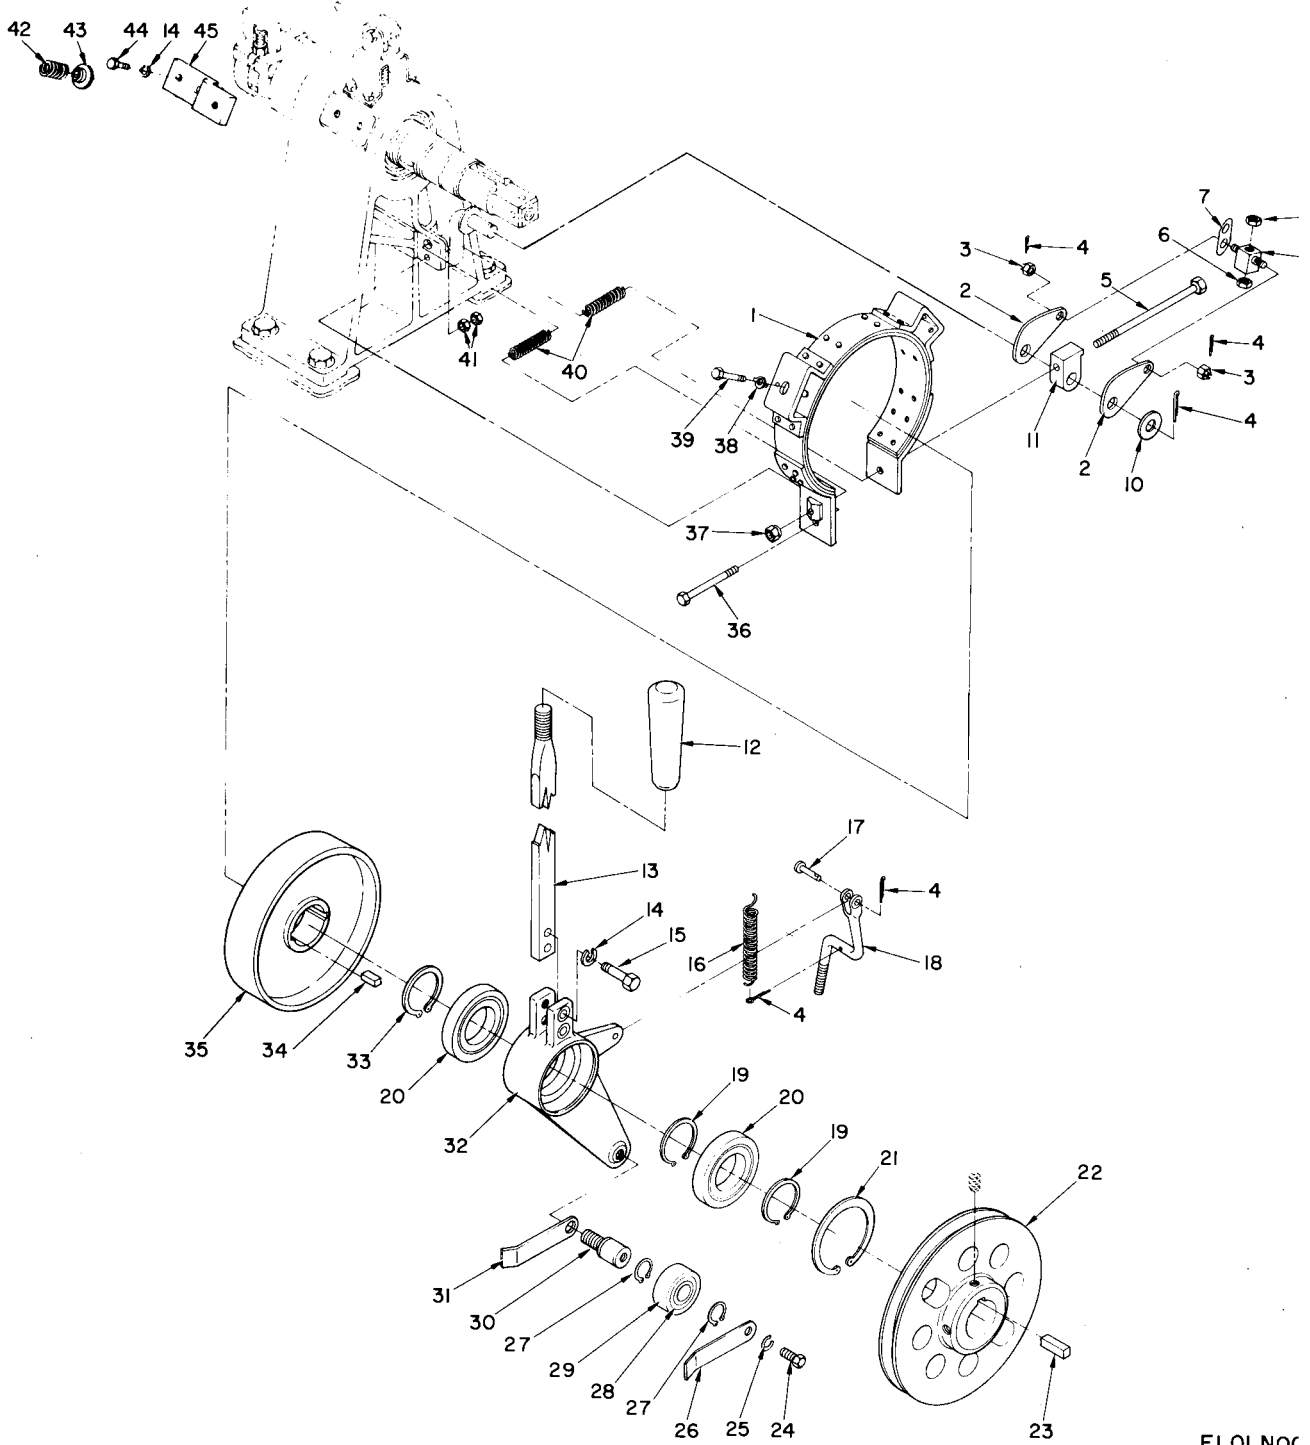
Clutch and Brake Assembly 1A2 (Sheet 1 of 2).
